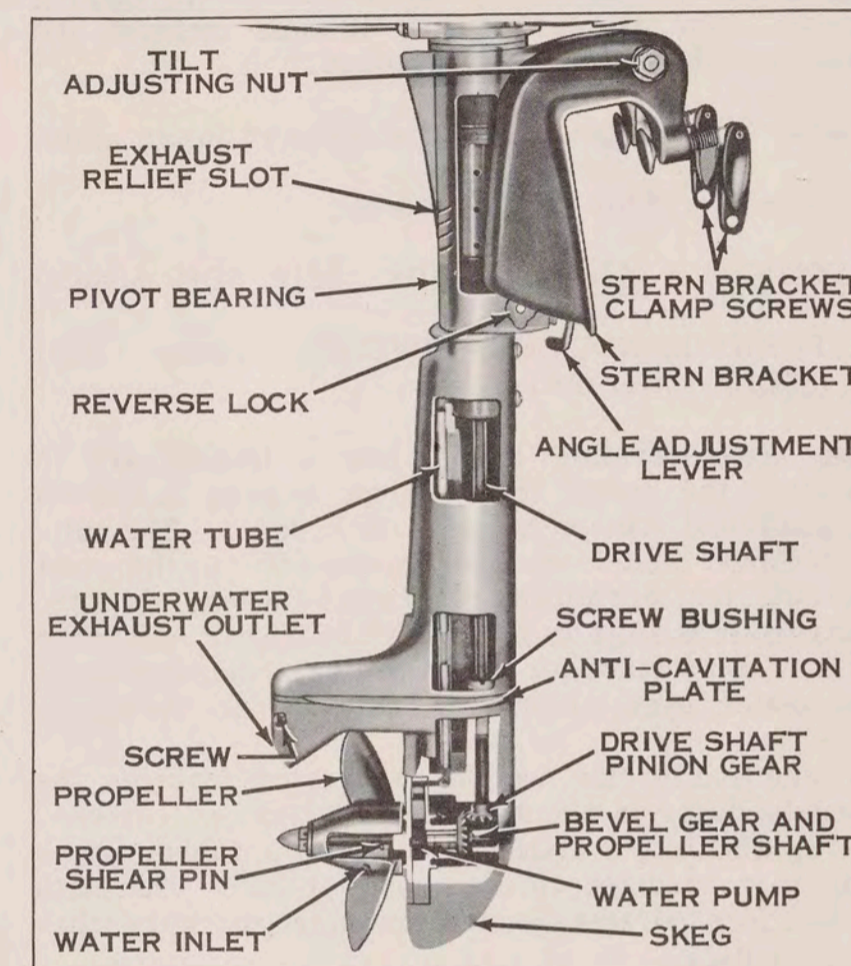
Cutaway of 3 H.P. Lower Unit
